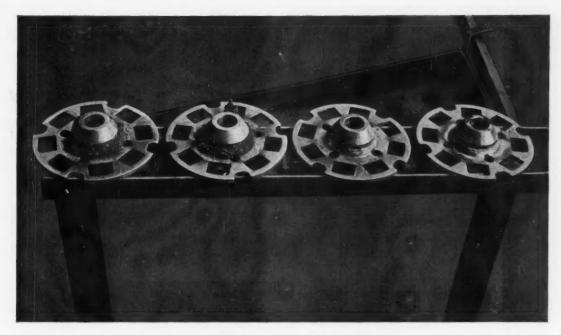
Simple rack is used to support discs immediately after welding. When cool, the weldments are tumbled to remove caked flux.
